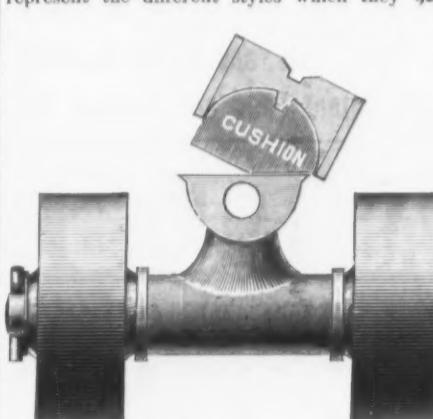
Sectional View of Rocker and Adjustable Box.
